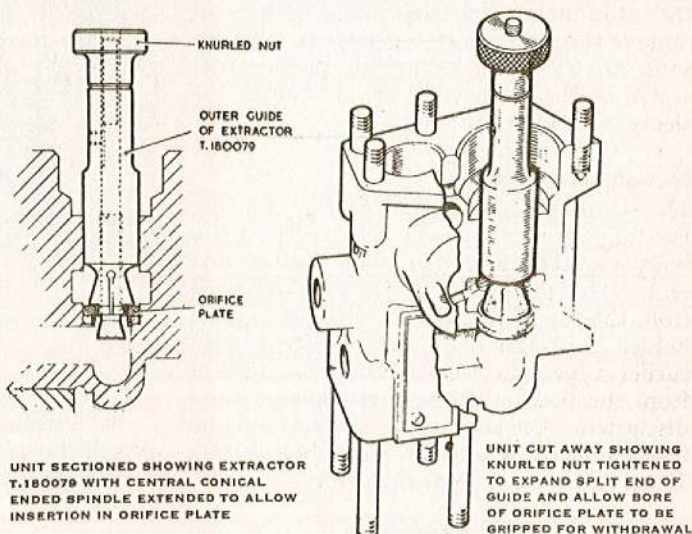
View showing use of extractor T.180079 for withdrawal of orifice plate
